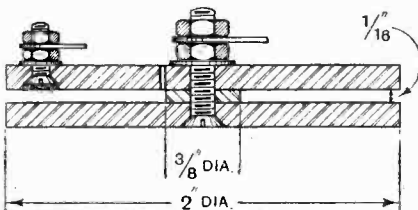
Sectional sketch of a hobbin former for an H.F. choke coil.
